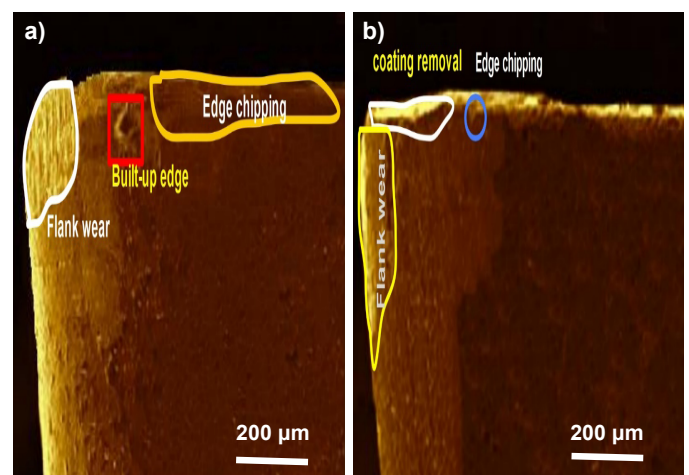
SEM images of the cutting tool after machining a) 7th run b) 8th run
